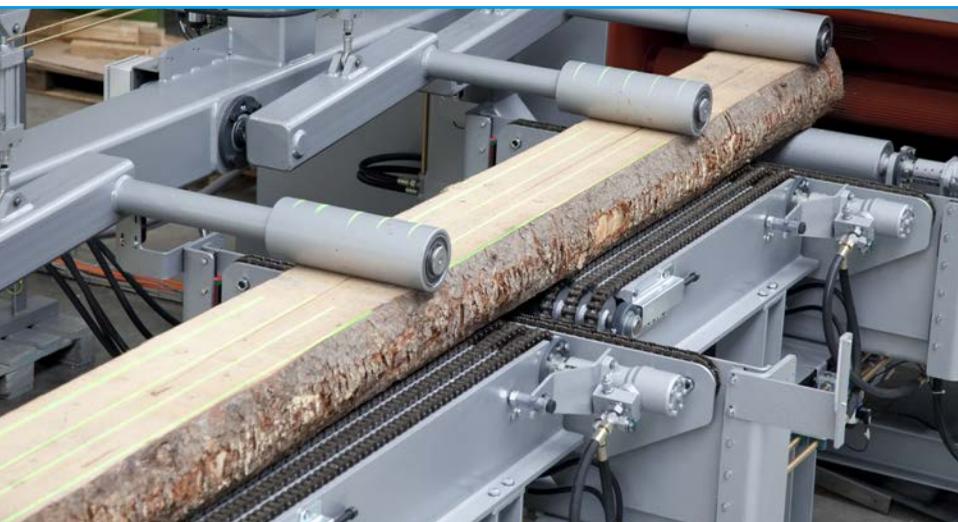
The SAB semi-automatic infeed system ensures accurate and reliable feed of heavy workpieces
